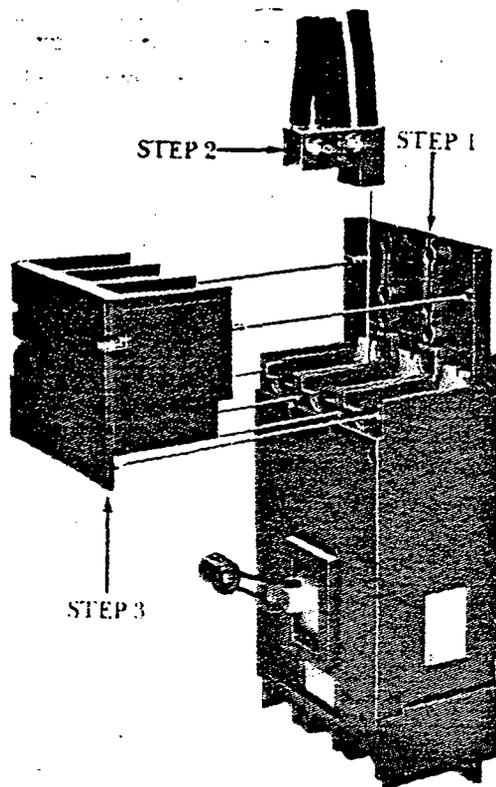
SKP Frame terminal-cover assembly for upper (line) end.
